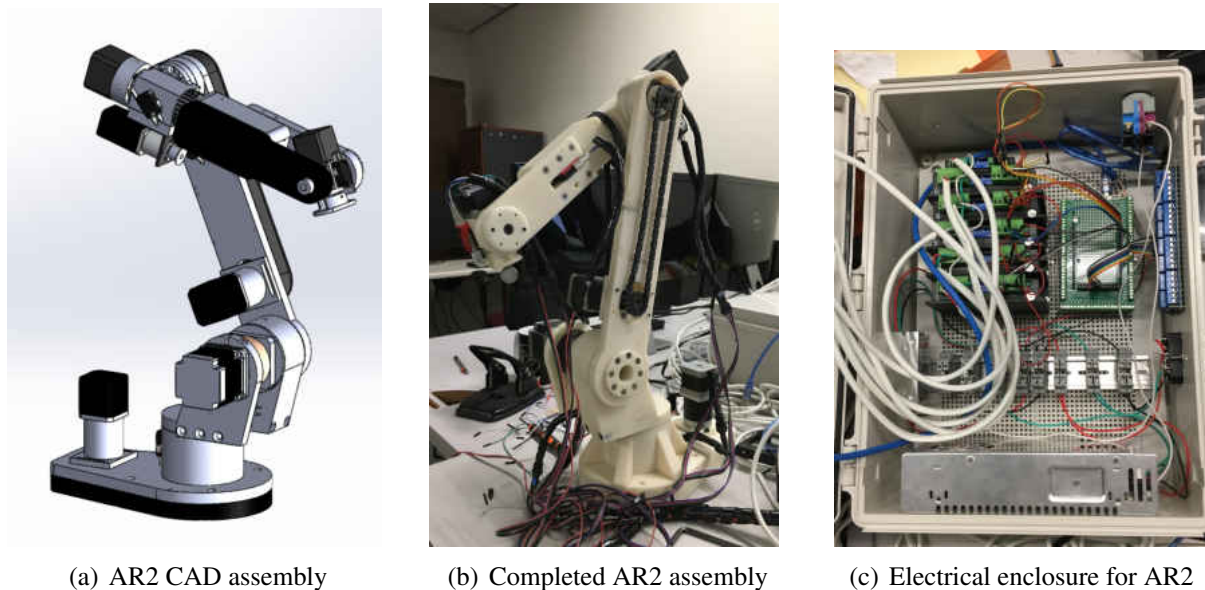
AR2 manipulator CAD, 3D printed models and electrical enclosure
